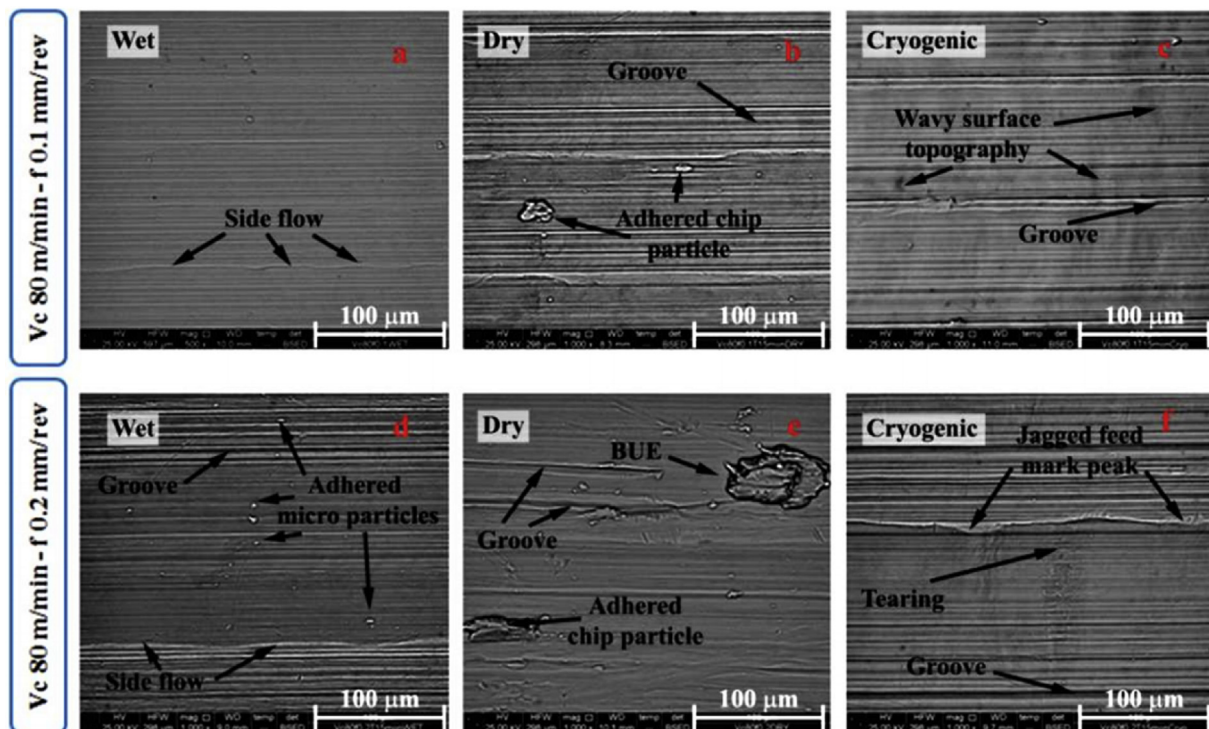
Induced surface defects when turning of AMed Ti–6Al–4V under dry, wet and cryogenic cooling [77].
